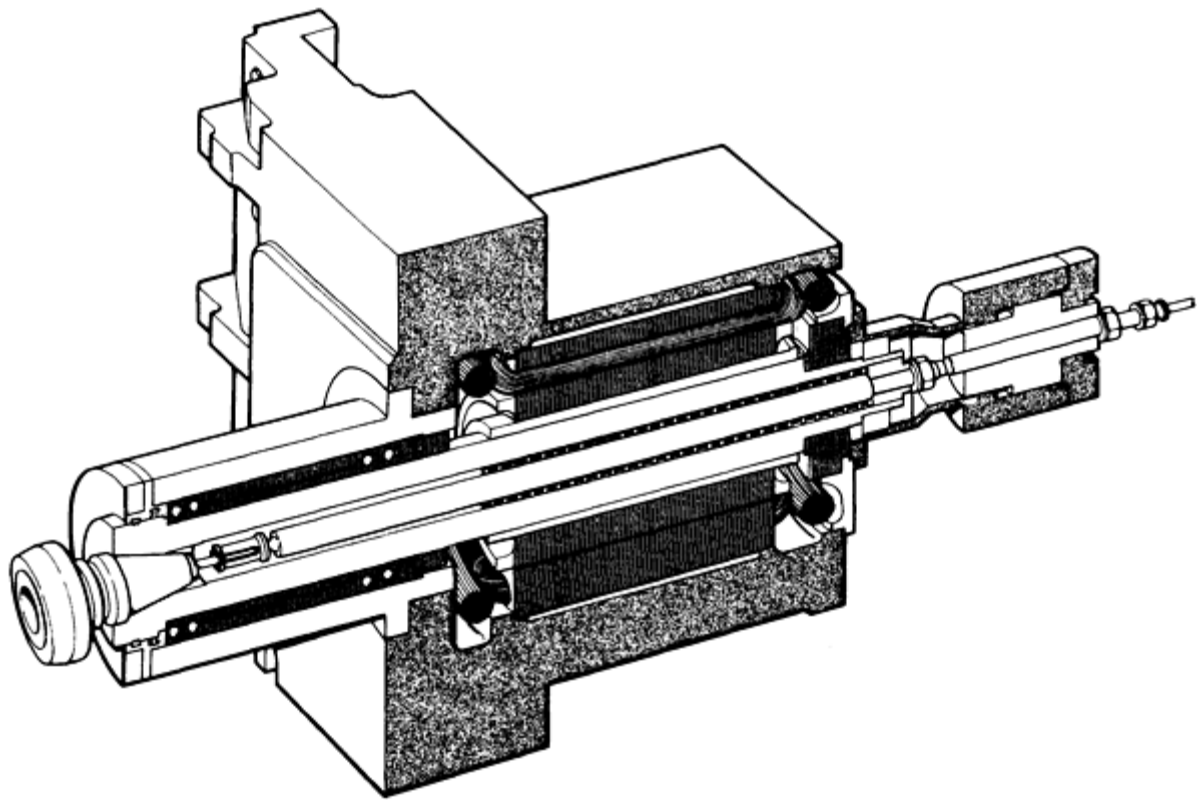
Spindle head with built-in motor for high-speed (up to 12,000 rpm) finish milling
